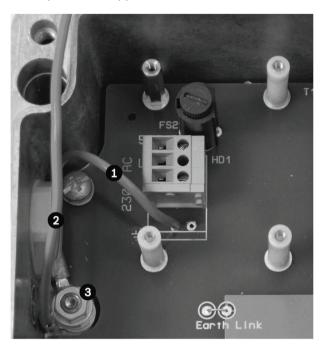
Mains input with shield removed, showing terminal block HD1 before wiring
